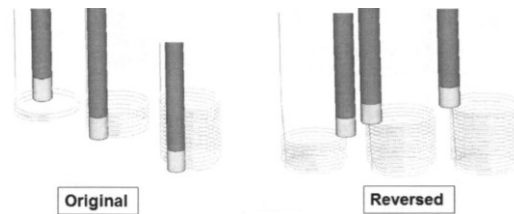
Original milling toolpath (left) and the additive toolpath obtained reversing the milling toolpath (right) (from [77])
